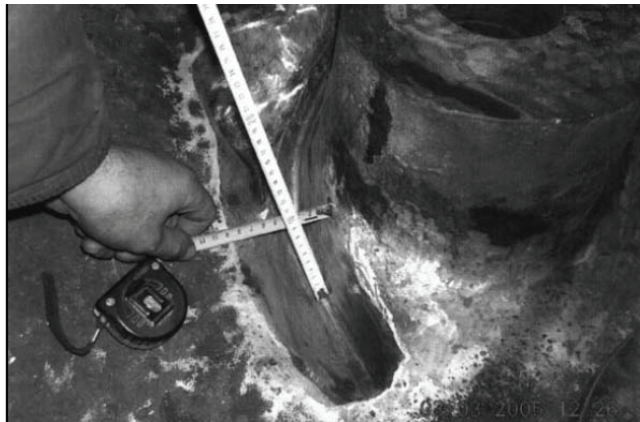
The crack 420 mm long had been eliminated after 100 mm deep grinding
